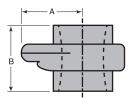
Butt Weld Color Code: Red Subs/Blue Nut
